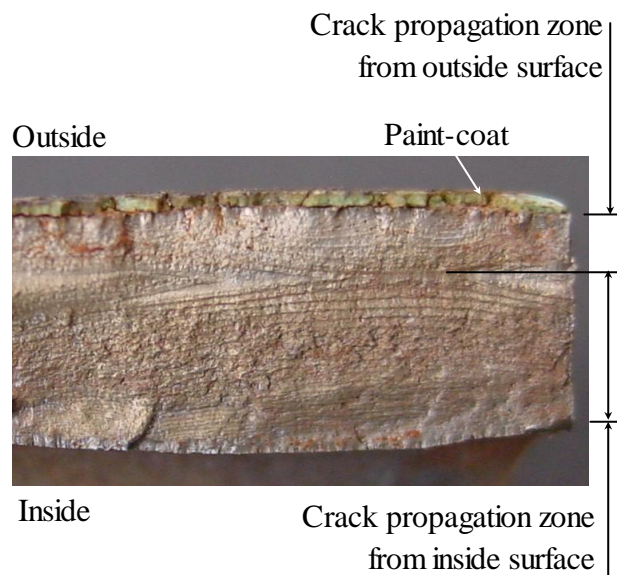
Fracture surface of seam weld (specimen LCF20N1)
